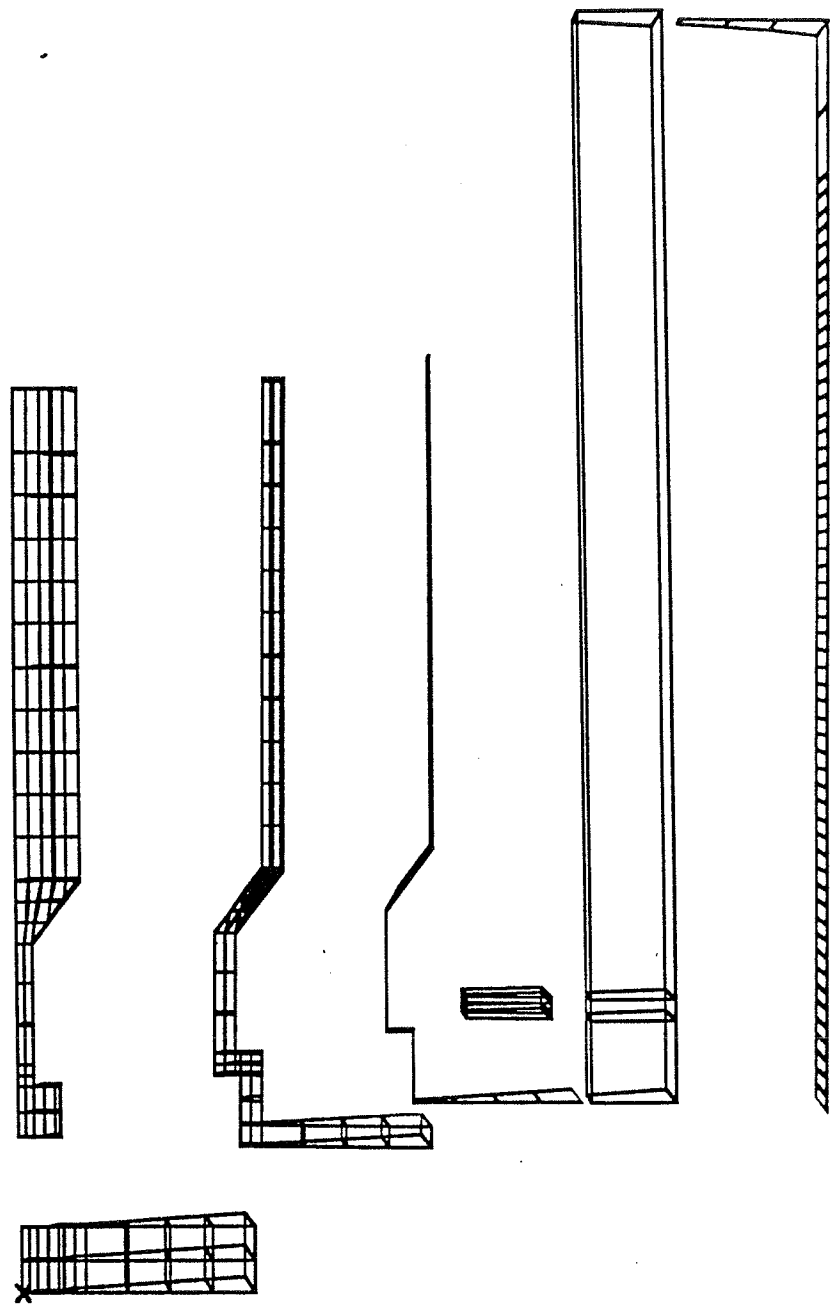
Exposed view of casting, mold, mold surface, baffle, intercept and baffle surfaces, furnace surface and chill plate.
